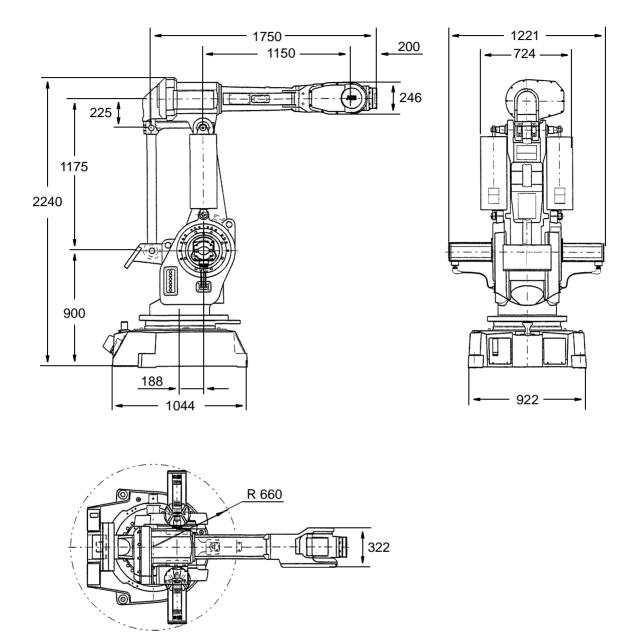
View of the manipulator from the side, rear and above (dimensions in mm).
